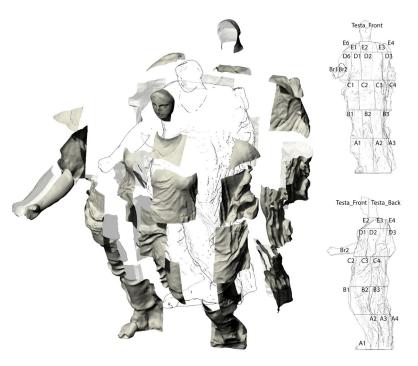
Digital model subdivision for formwork printing by FDM printer.
